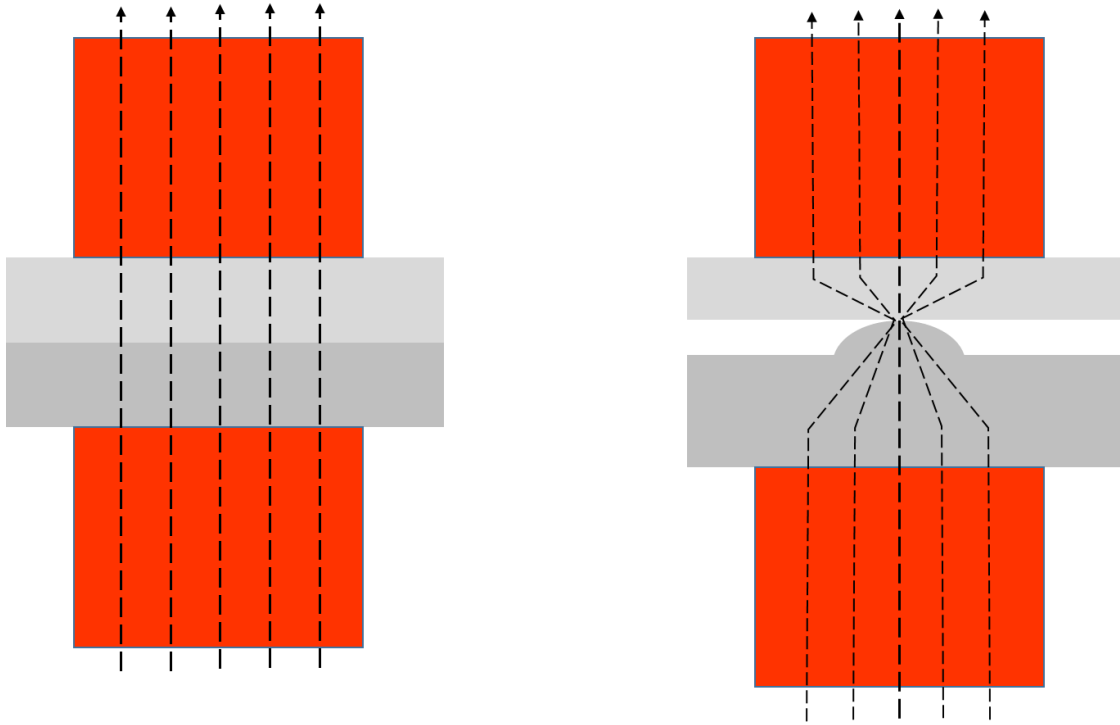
Schematic showing a typical resistance weld between two flat sheets (left) and a projection weld (right). Dashed lines show flow of welding current.
